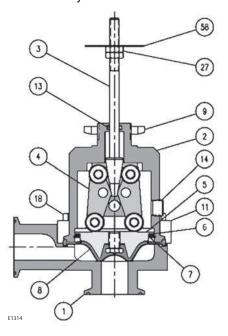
Baumann 84000 NPS 1 Inline Valve Body Sub-Assembly
